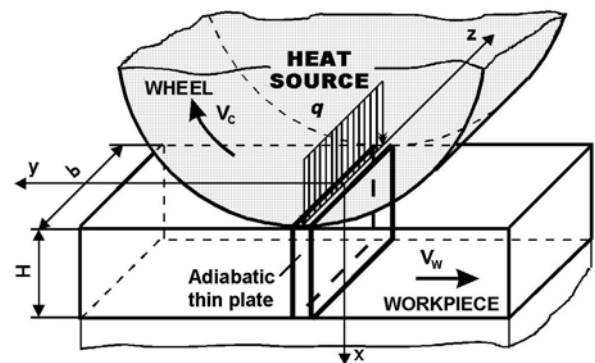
Model of heat transfer in an elementary workpiece part in surface grinding
